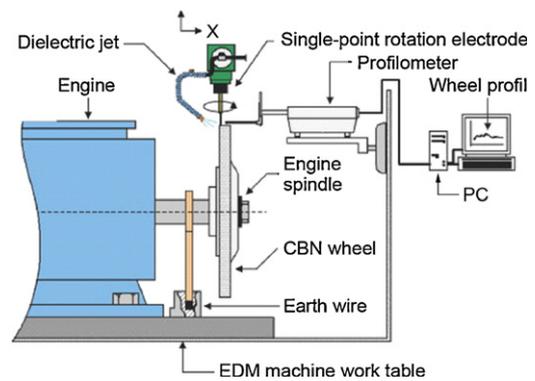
Schematic of a single point SEDD grinding machine [168].
